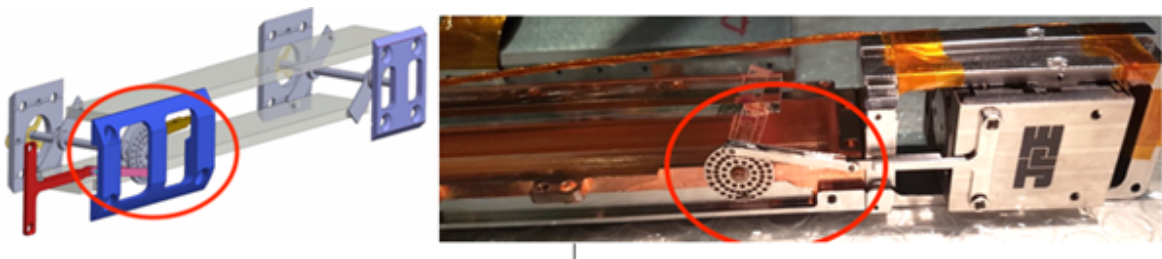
CAST-CAPP tuning mechanism. Locomotive wheel and the coupling rod are indicated by red circle on both the photograph and the technical drawing.
